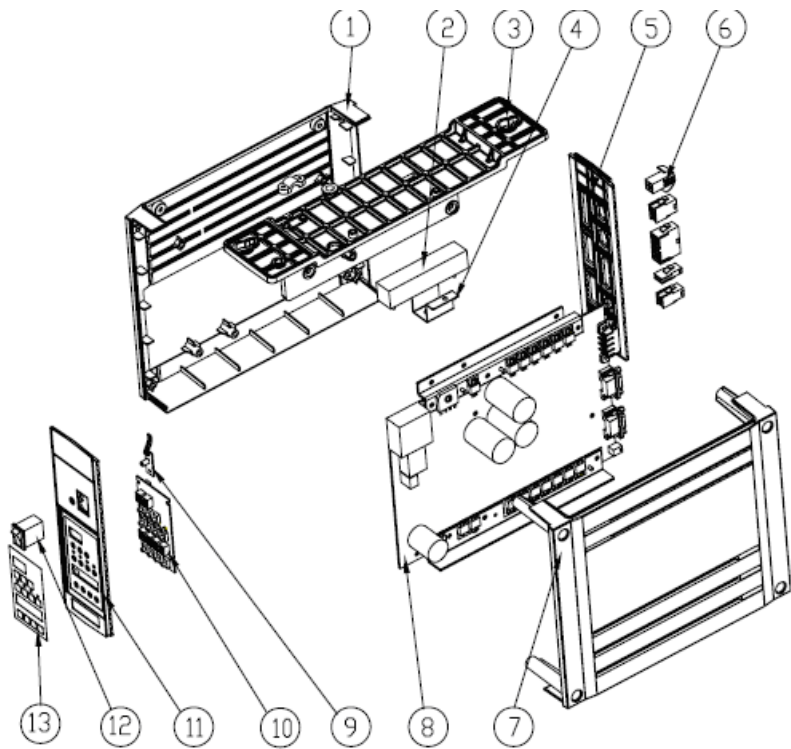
Illustration drawing of motor internal installation for direct driven interlock sewing machine applicable for ASD50 control system
